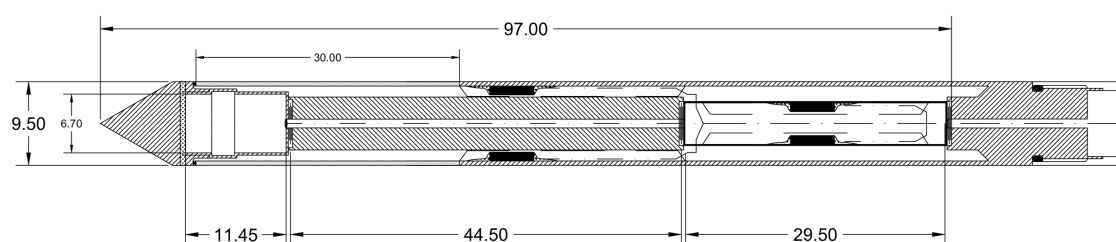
Design 3: 9.5 mm ϕ (Dimensions in [mm])
